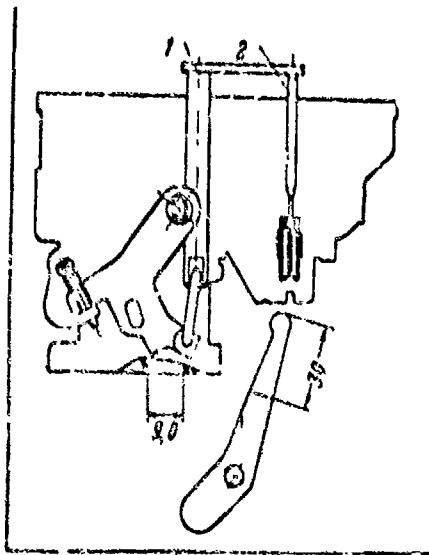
Diagram of adjusting the moment of the mechanical drive economizer valve opening:
